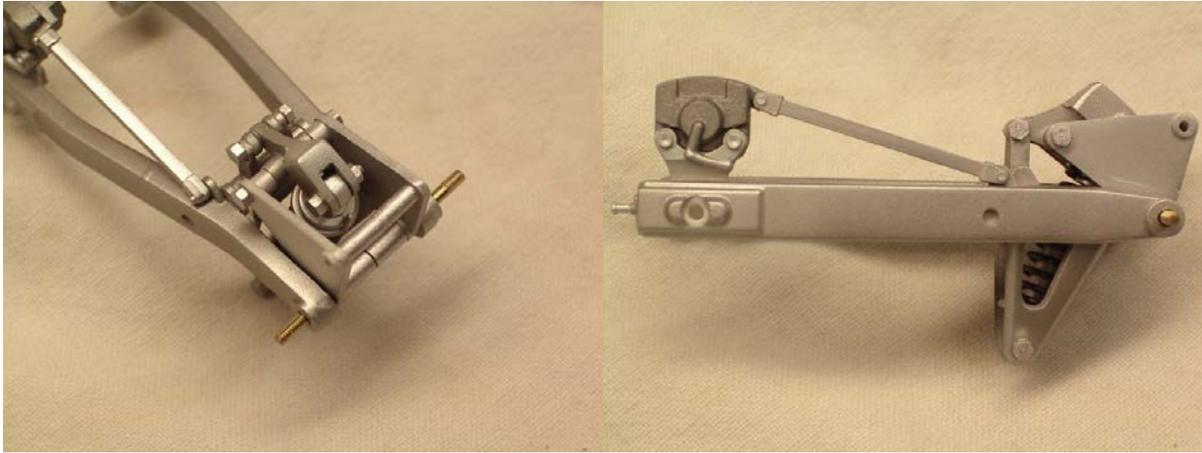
Rear swingarm with 00-90 nuts and bolts
